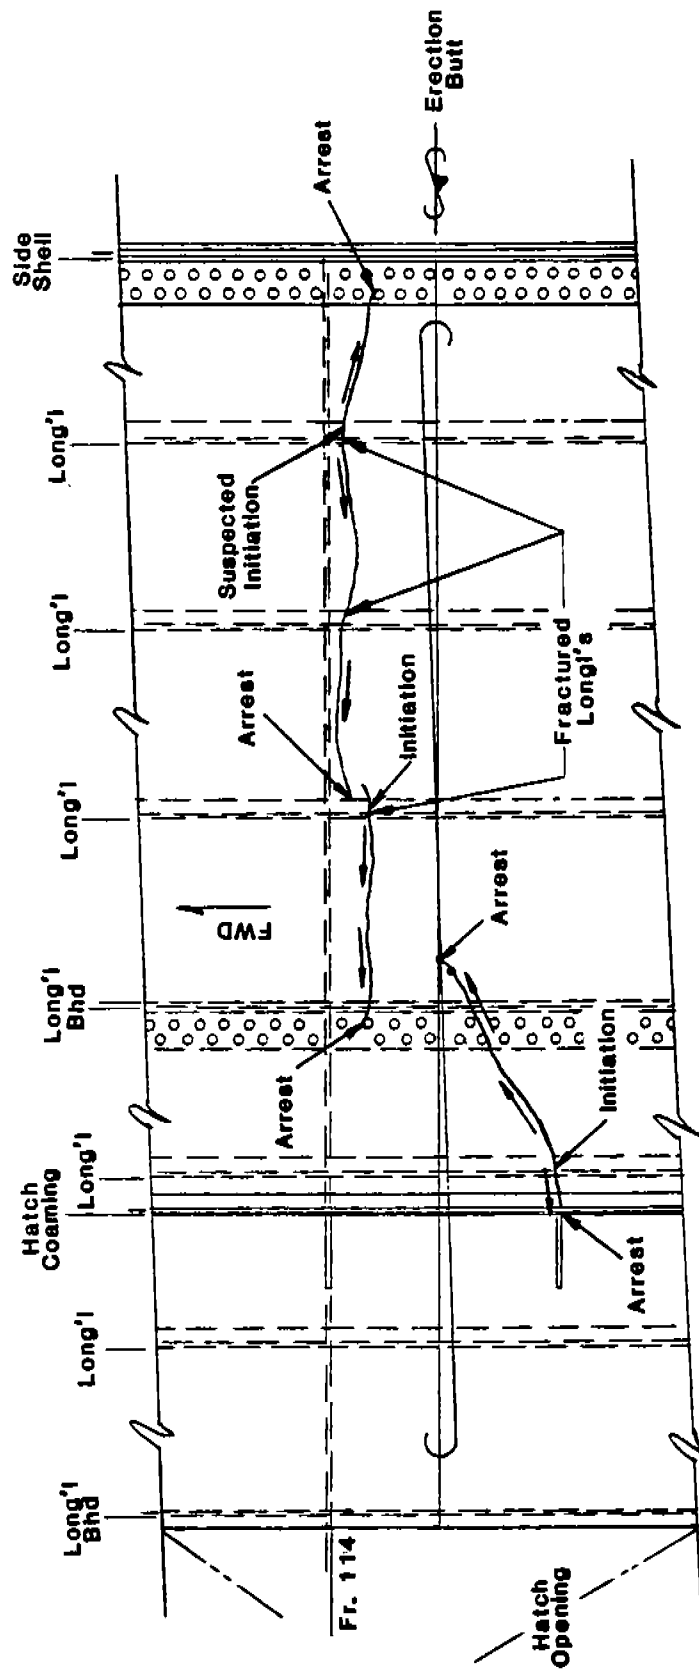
Plan of Spar Deck Fracture Initiation and Arrest Points
